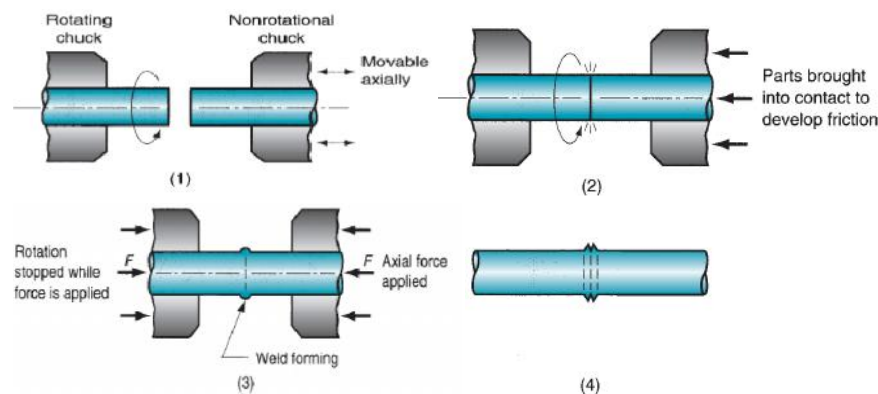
FIGURE Friction welding (FRW): (1) rotating part, no contact; (2) parts brought into contact to generate friction heat; (3) rotation stopped and axial pressure applied; and (4) weld created.
